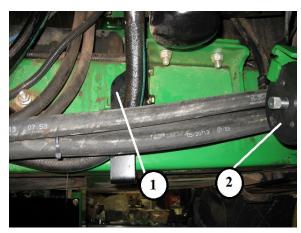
LH Side Mounting Location Key 1 – Rear Shield LH Support (RC101207-1)
